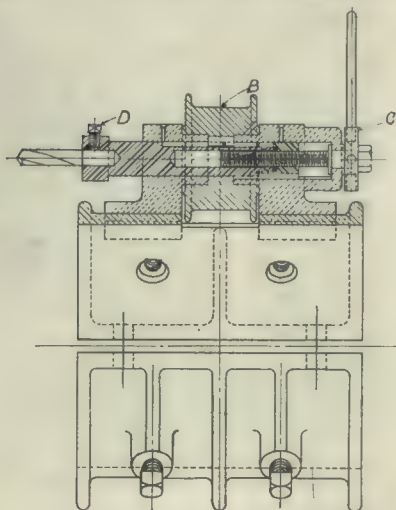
Arrangement of Hub Liner Drilling Machine.
